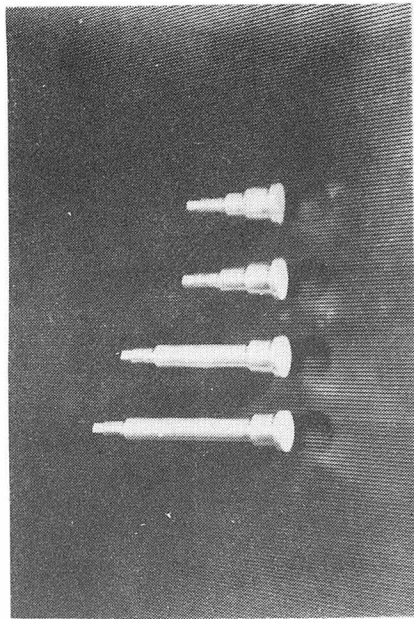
ROTOR AND STATOR BLADE BLANK PLUGS
